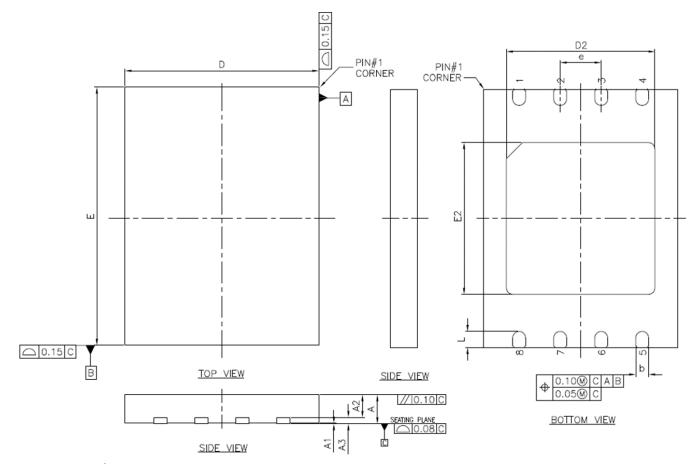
PACKAGE OUTLINE 6x8 MM 8-LAND DFN (DESIGNATOR DG)
